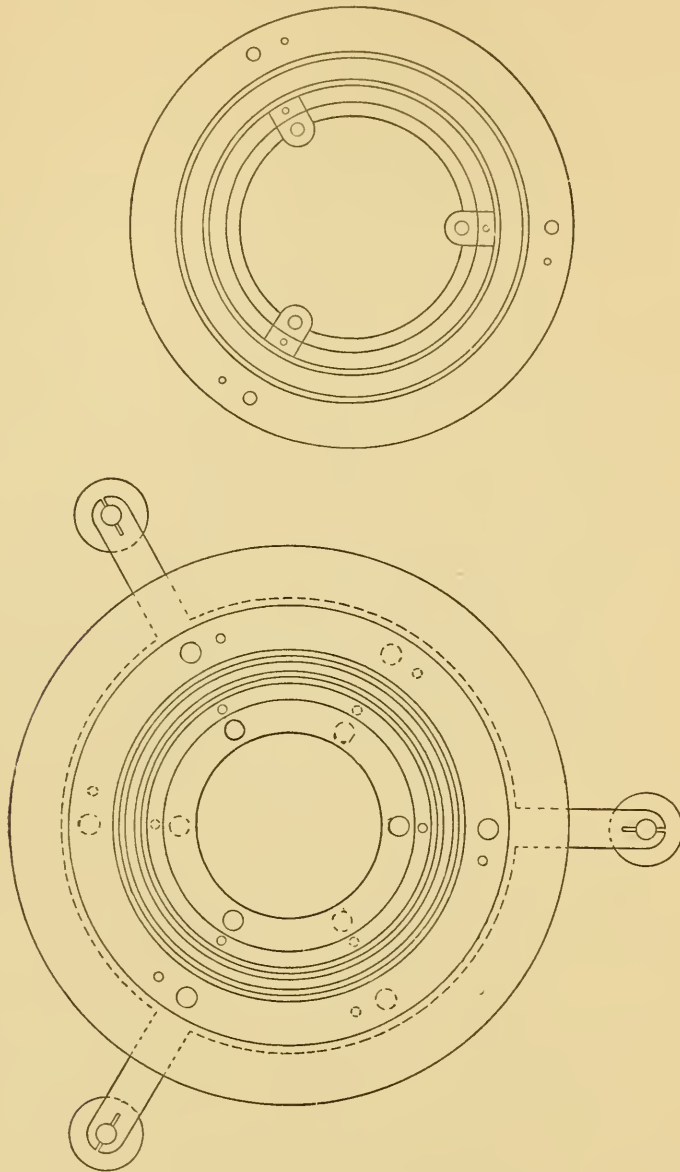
Plan of Base of Cylindrical Condenser, showing Method of Attachment of Cylinders.
